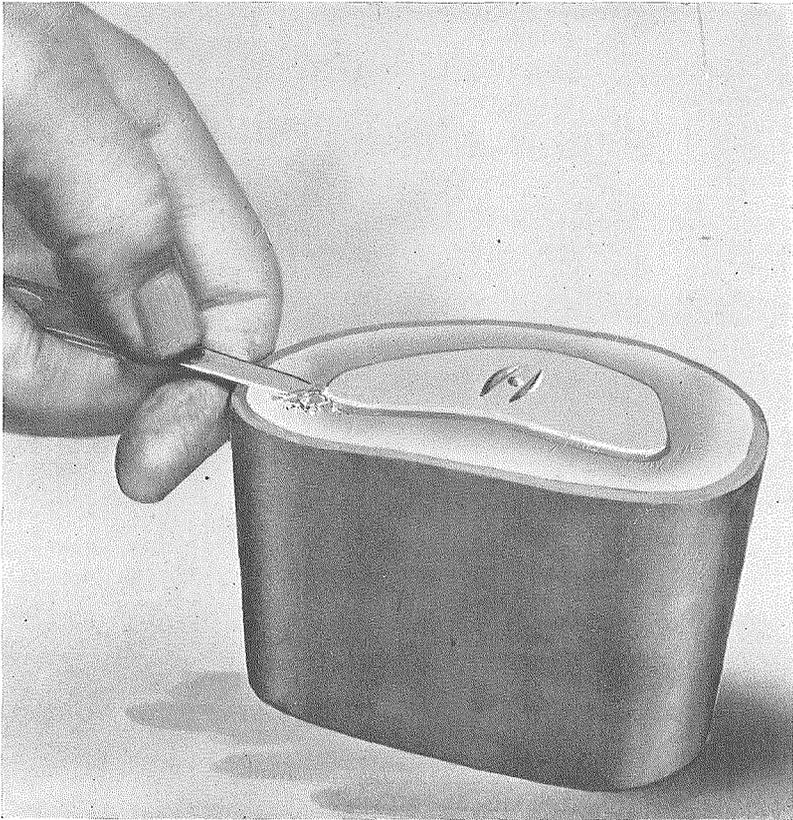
Removing Thin Section of Sand to Release Model Margins
